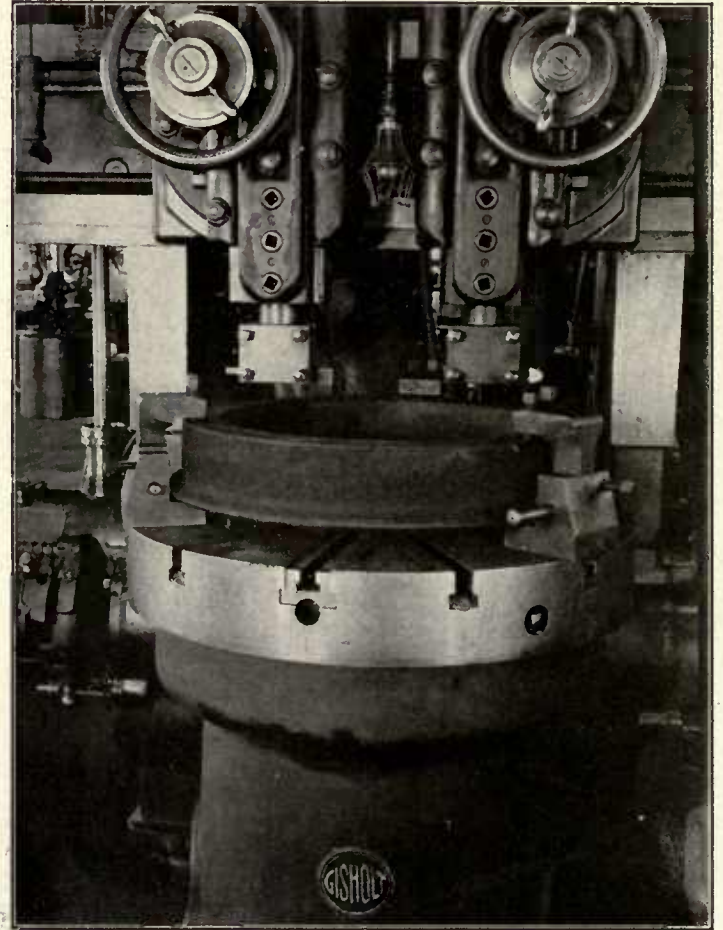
Tire Boring Chucks as Used on Boring Mill.
